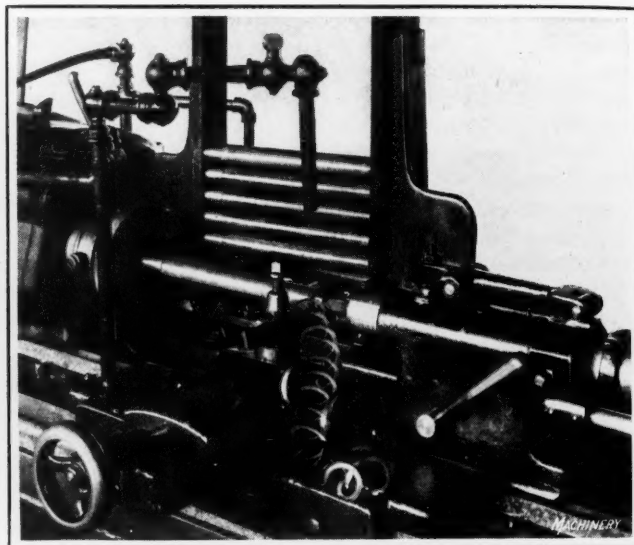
Automatic Lathe engaged in taking a Heavy Cut on Work mounted on the Centers
